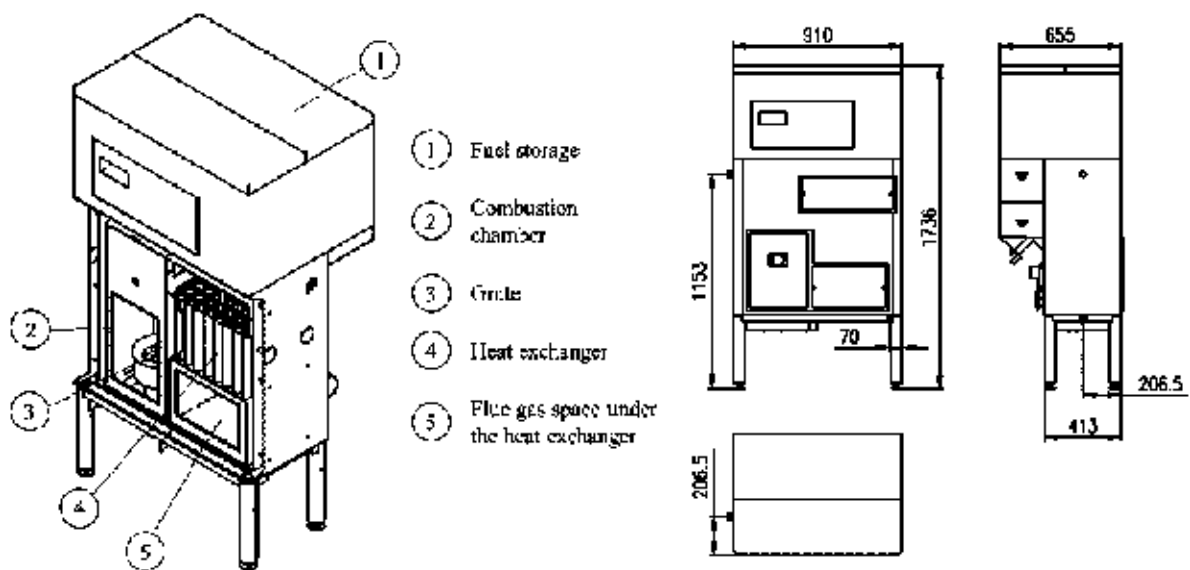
Sketch of the boiler with major components and main dimensions (mm) [165].
